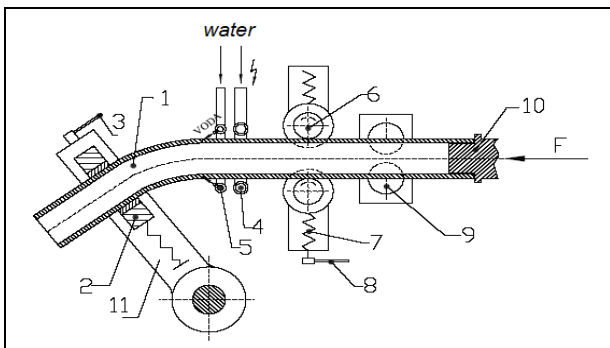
Functional scheme of continuous incremental bending procedure: (1) Tube, (2) Jaw, (3) Handle, (4) Gas or induction heater, (5) Cooling water jets, (6) Support rollers, (7) Leading rollers, (9) Cross slide, (10) Forcing spine, (11) Movable hand.
